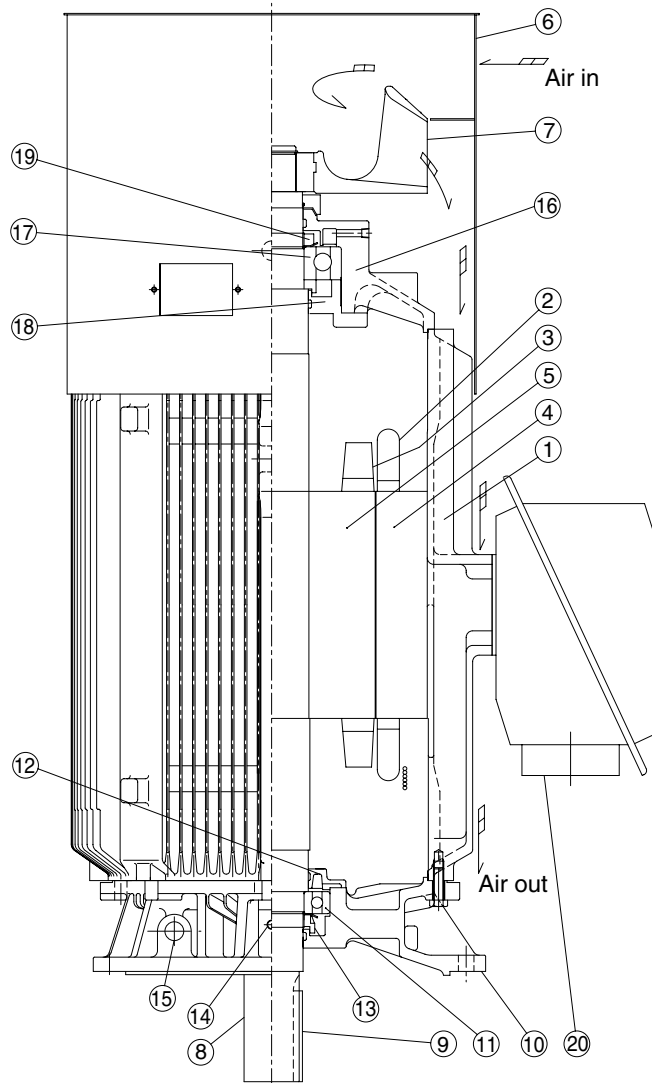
Section Drawing of Vertical flange mount (Frame size 280)
